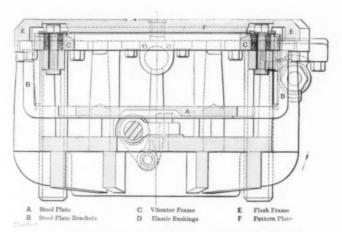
VERTICAL SECTION THROUGH MACHINE.
